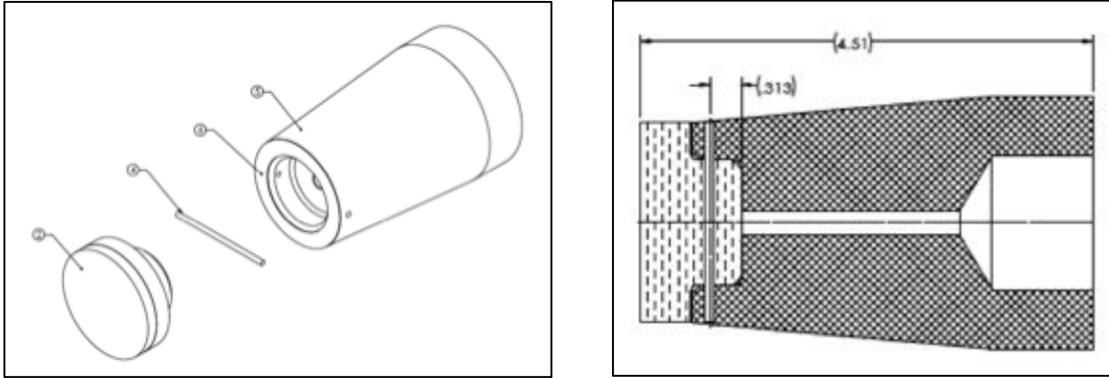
A simple flat face model may require a mechanical attachment (pin) in addition to bonding it to the model holder assembly to ensure the model does not disengage from the post after test cool down.
